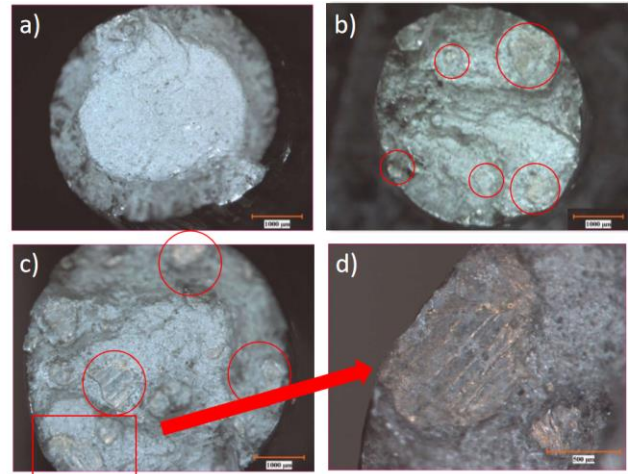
Stereo-microscope images of fracture surface of (a) Specimen 1 (b) Specimen 2 (c,d) Specimen 3.
